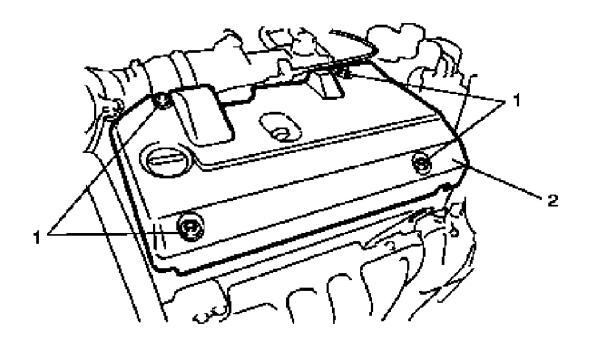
Removing Engine Cover From Cylinder Head Cover Courtesy of SUZUKI OF AMERICA CORP.
